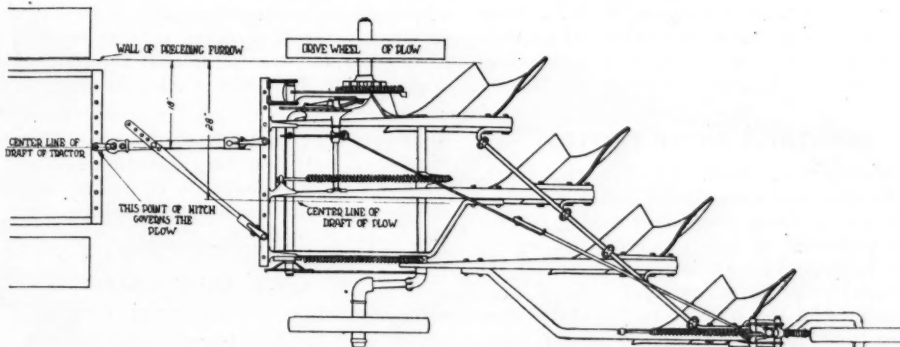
Four-bottom plow attached to tractor designed for one drive wheel to run in the furrow
